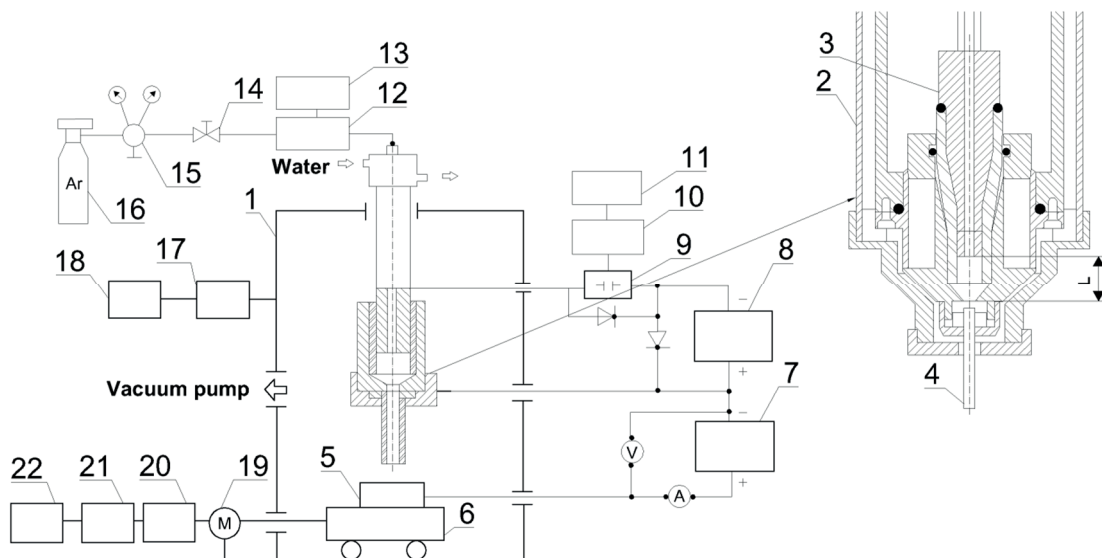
Scheme of the vacuum installation used: 1 – Vacuum chamber; 2 – Torch; 3 – Auxiliary electrode; 4 – Hollow cathode; 5 – Workpiece; 6 – Auxiliary equipment providing progressive movement; 7 – Main power source; 8 – Auxiliary power source; 9 – Capacitor battery; 10 – Capacitor voltage regulator; 11 – Regulator power supply unit; 12 – Plasma-forming gas flow controller; 13 – Plasma-forming gas monitor (reading gauge); 14 – Micro inlet valve; 15 – Reducing valve; 16 – A cylinder of plasma-forming gas; 17 – Vacuum controller; 18 – Vacuum gauge; 19 – Electric motor setting in motion the welding table; 20 – Amplifier; 21 – Digital-analogue converter operating the electric motor; 22 – Speed setting module
